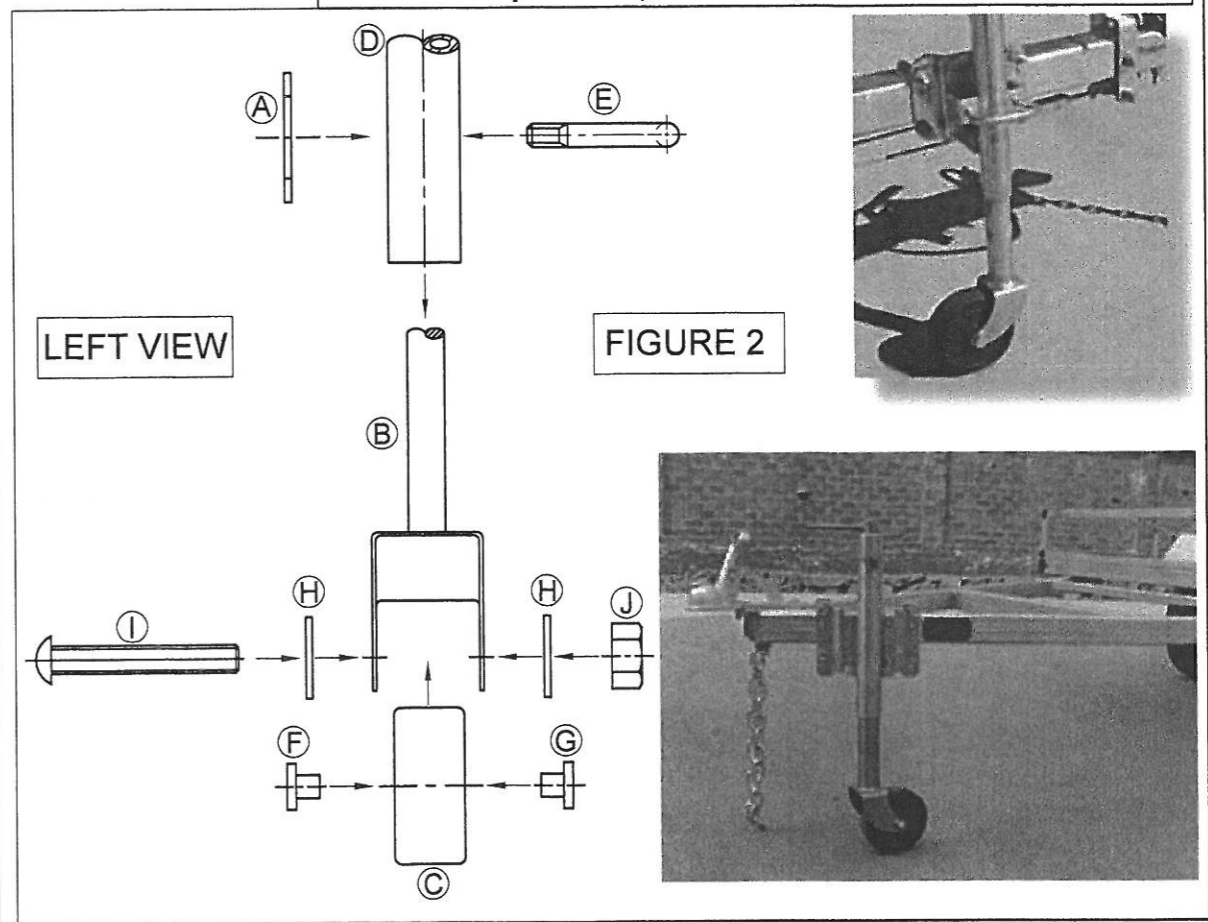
shows a photograph of a JOCKEY WHEEL, as well as an exploded view of how the components of a similar, simplified system are assembled. Figure 1 shows the different components that need to be assembled.
